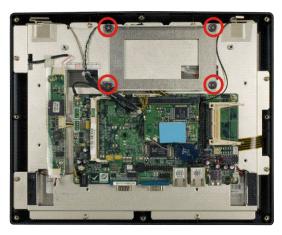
Four Hexagonal Pillars on the Bottom Panel
